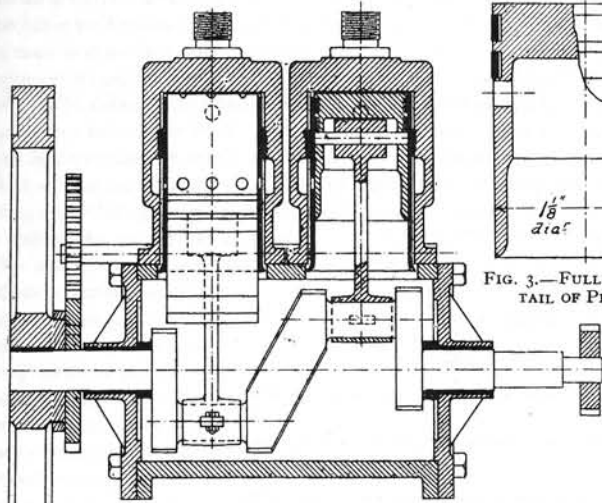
LONGITUDINAL SECTION OF ENGINE.
